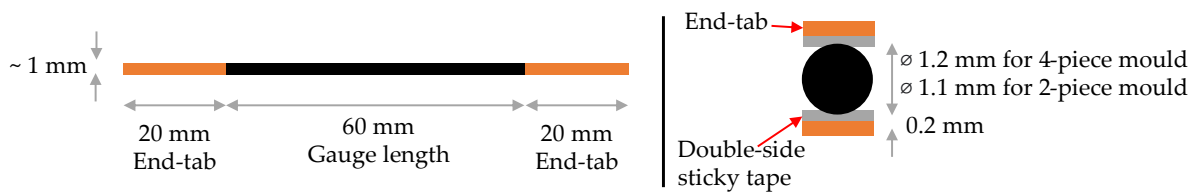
Schematic of circular filament specimen produced from moulded filament with 4-piece and 2-piece mould and the end-tab position in top and side view.
